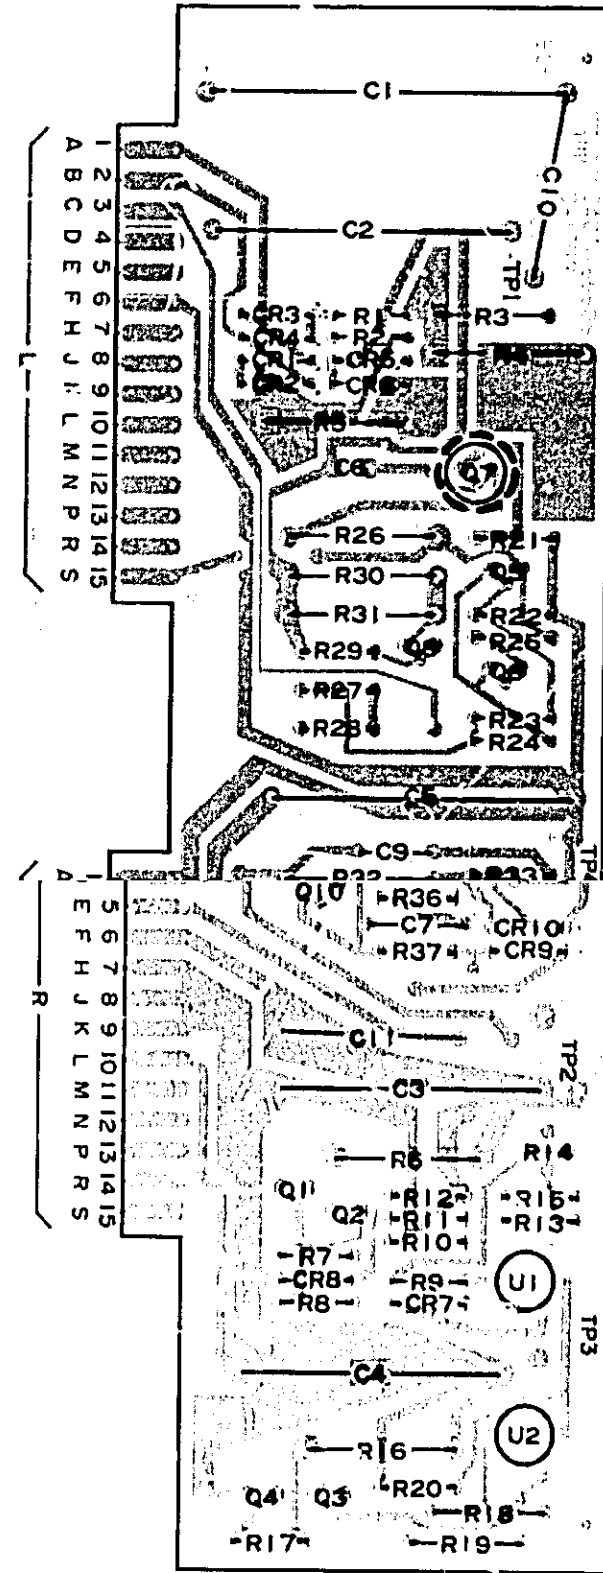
A3 DC Power Supply Board Assembly Component Locations.
